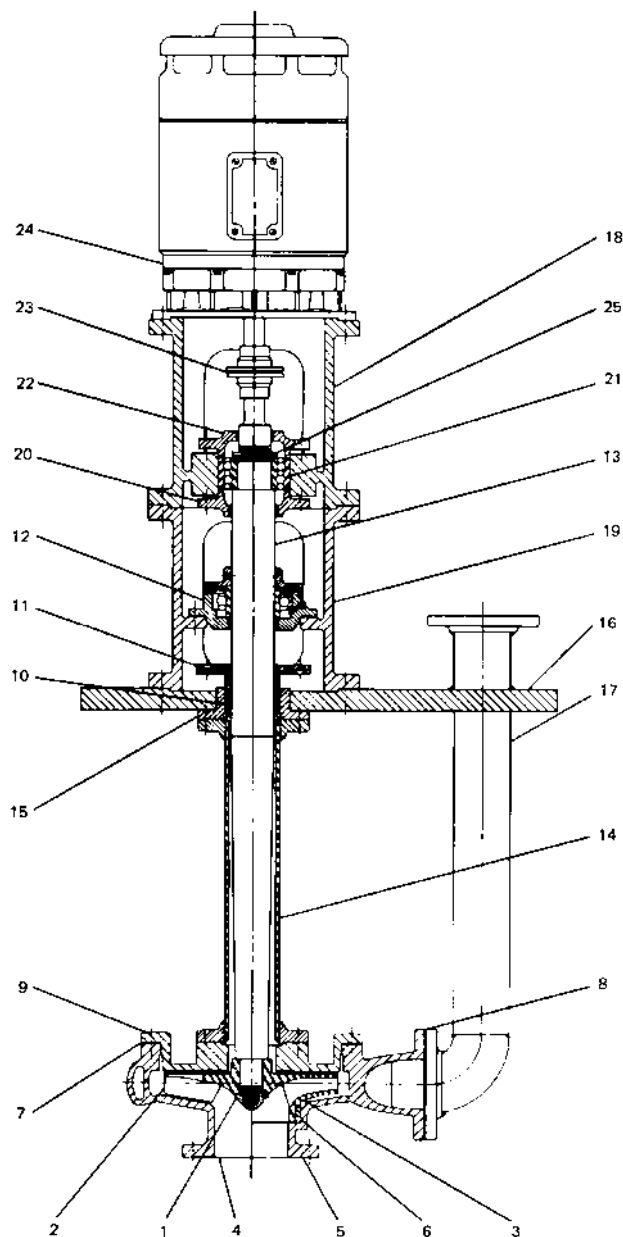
Vertical wet-pit cantilever-type volute pump: (1) impeller nut, (2) open impeller, (3) closed impeller, (4) open casing, (5) closed casing, (6) casing wearing ring, (7) casing gasket, (8) discharge flange gasket, (9) back cover, (10) packing or mechanical seal, (11) packing or seal gland, (12) radial bearing, (13) shaft, (14) supporting pipe, (15) separate stuffing box, (16) sump cover, (17) discharge pipe, (18) upper motor pedestal, (19) lower motor pedestal, (20) lower thrust bearing cover, (21) thrust bearing, (22) upper thrust bearing cover, (23) coupling, (24) motor, (25) bearing locknut and washer (Laurence Pump)
